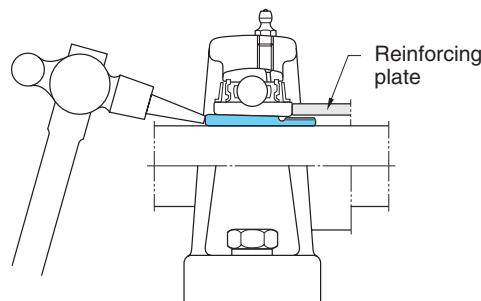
Fitting adapter sleeve to bearing with tapered bore
